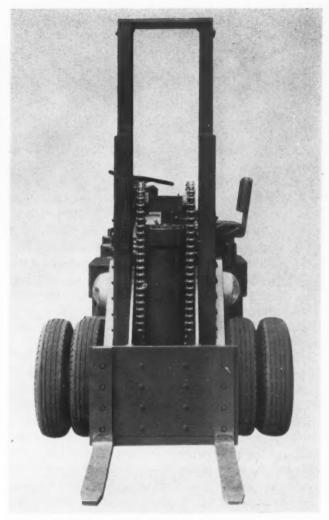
Two heavy duty roller chains work on sprockets mounted on piston rod, thus raising load twice the distance the piston travels. Cylinder is substantially mounted on extra heavy dead axle
